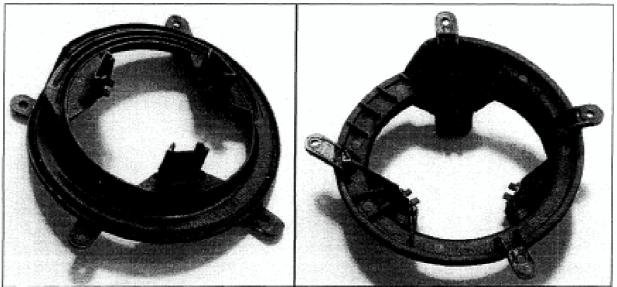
Top and bottom view of a motor holder, PA66/35%GF, dia 230mm
